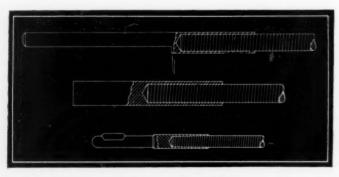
(Above)—Three representative drive fittings attached to flexible shafts. Fig. 6—(Right)—Two shafts applied to printing press transmit power for operating paper feeding mechanisms
